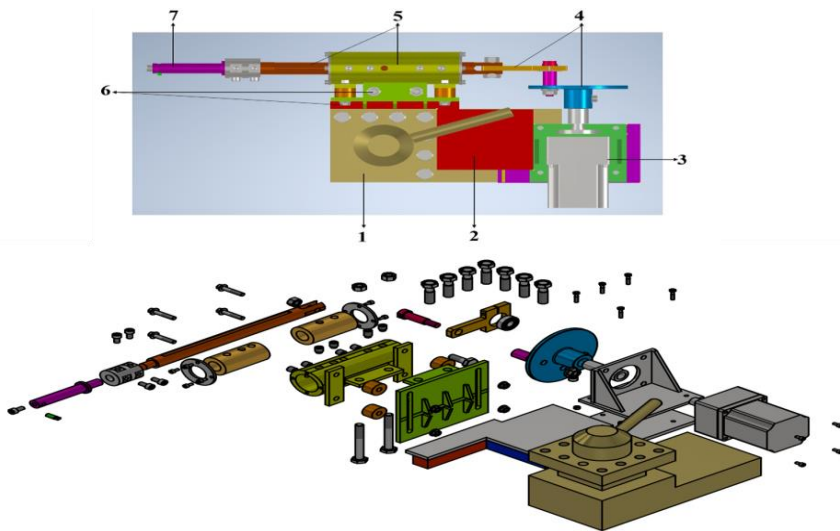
Three-dimensional model of the lathe-integrated keyway slotting mechanism
